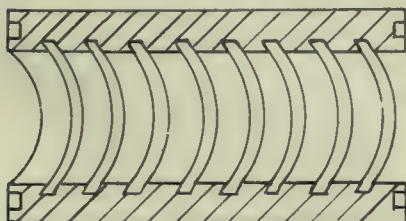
Section of Round Bushing With Square Thread Filled With Graphite.
